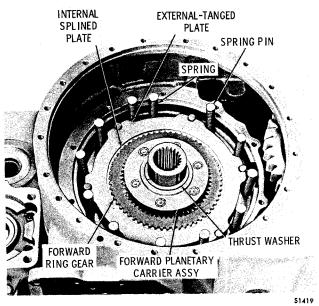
Forward clutch and planetary, clutch piston springs, and spring pins installed
